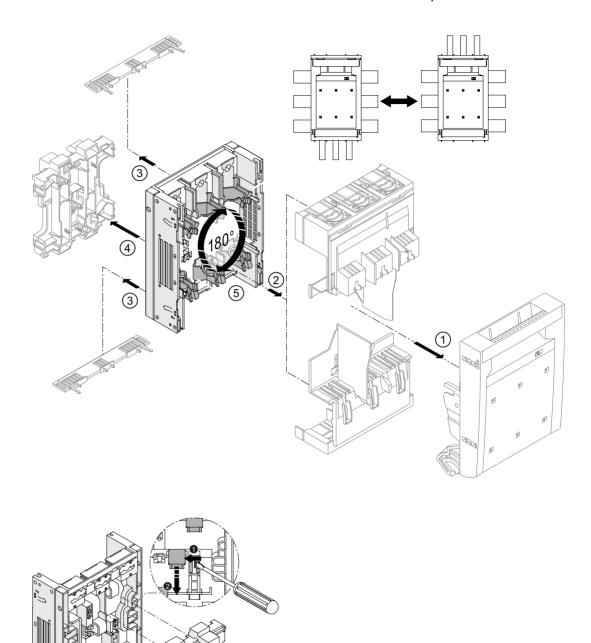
Installing the cable outlet, sizes 1, 2, 3
